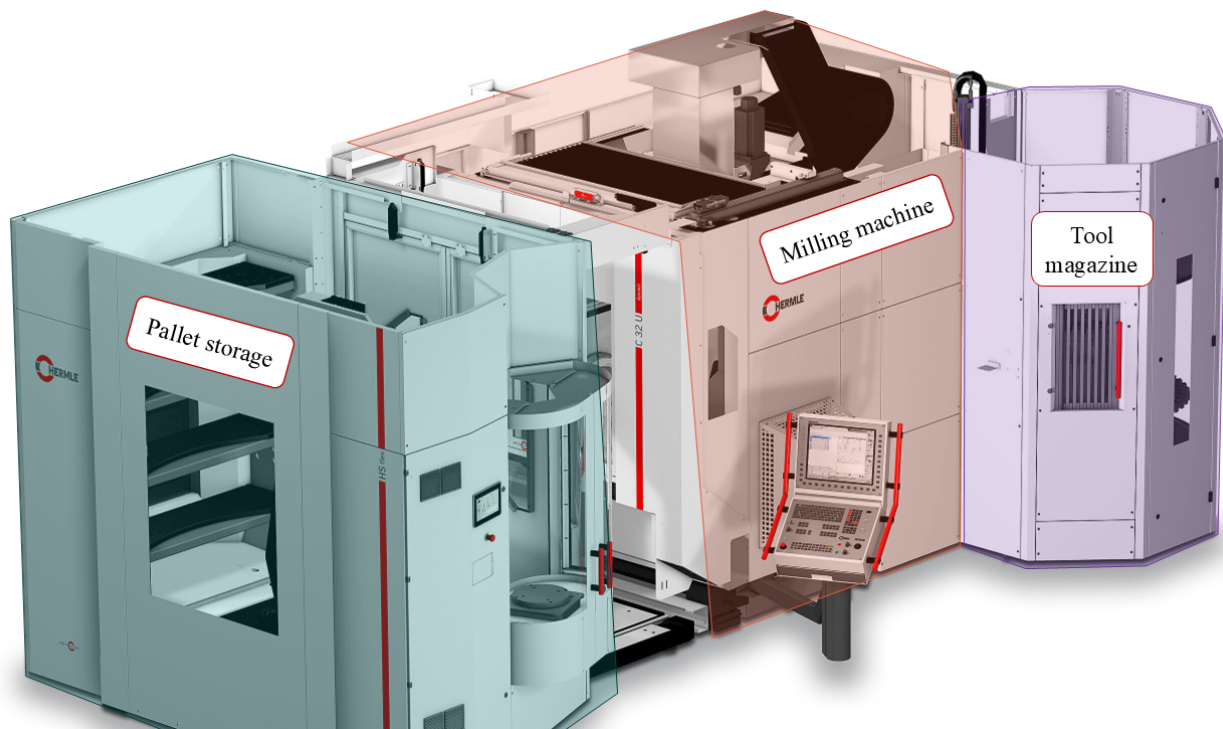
5-axis milling machine and its pallet storage and tool magazine
